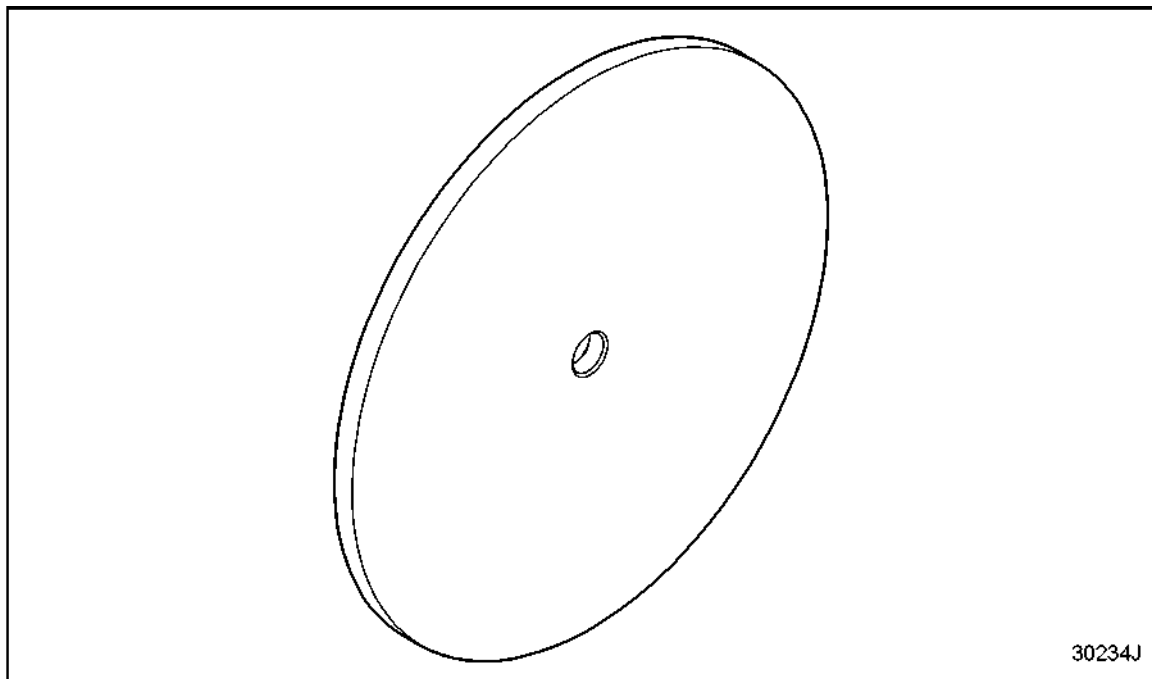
Front Crankshaft Hub Seal Installer,J 42736
